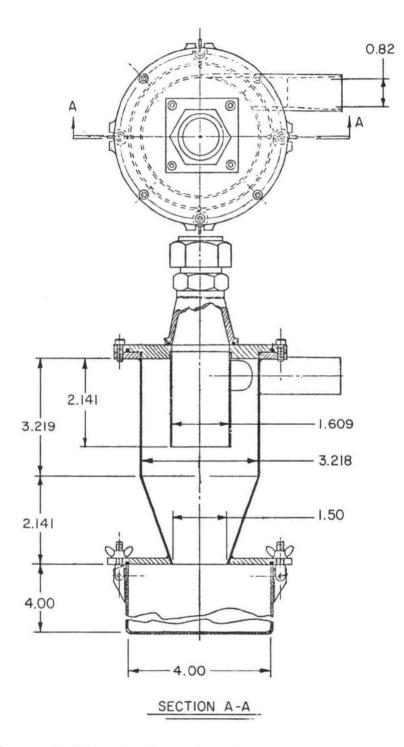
Engineering dimensions (inches) for Cyclone T3A.
